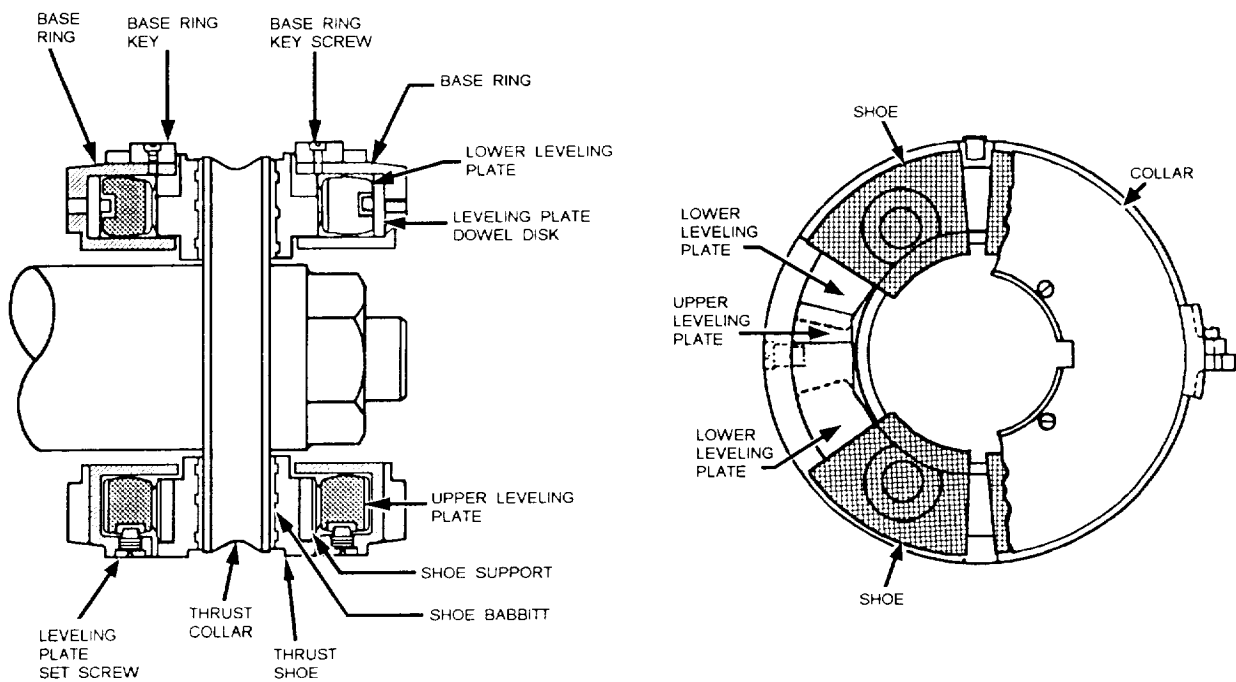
Kingsbury pivoted-shoe thrust bearing.
